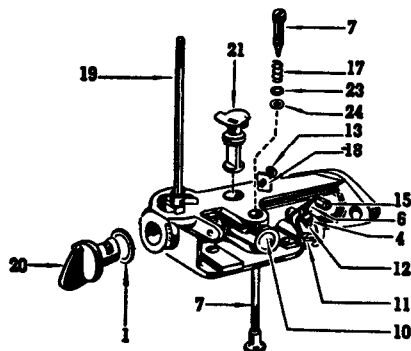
Exploded view of suction lift carburetor. Only one fuel mixture adjustment needle (7) is used.
